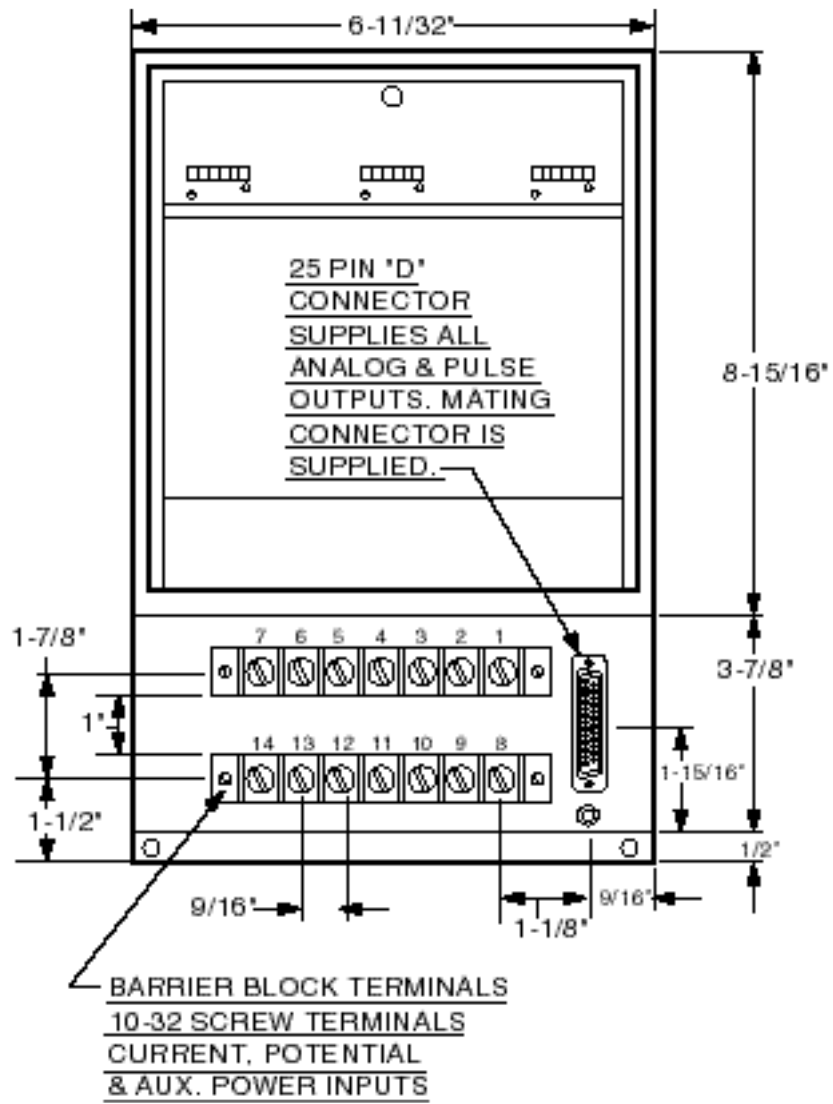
Outline and Dimensions for Front Connected (F Option) JEM1 Meters
